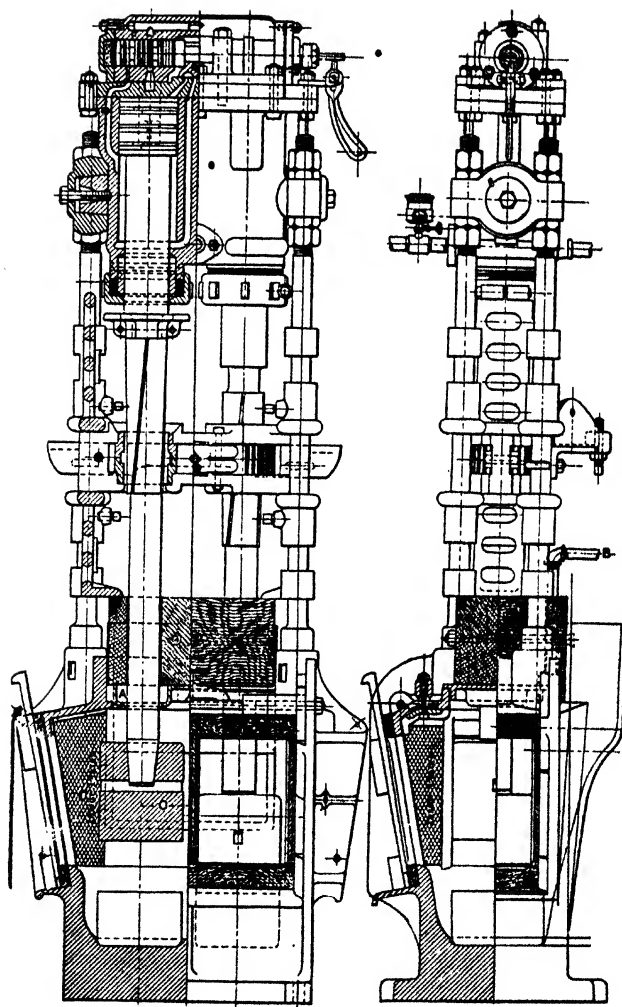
Treiman steam stamp. Sectional front and side elevations.
